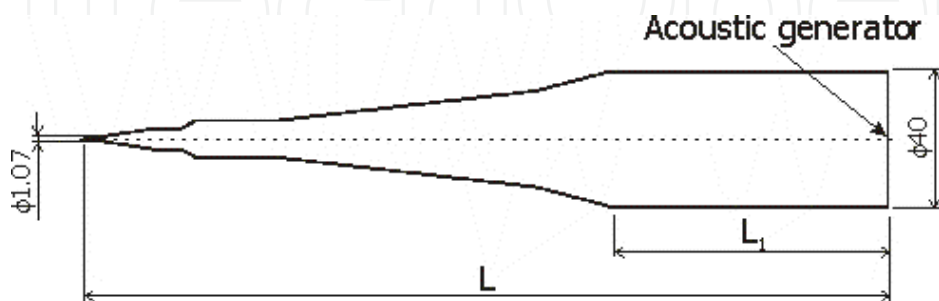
Schematic drawing of the confuser-shaped tube with circular cross-section
